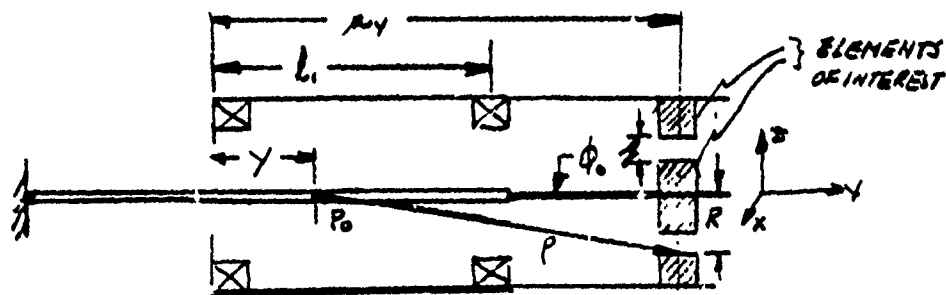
SHAFT & HOUSING MOUNTED ELEMENTS
